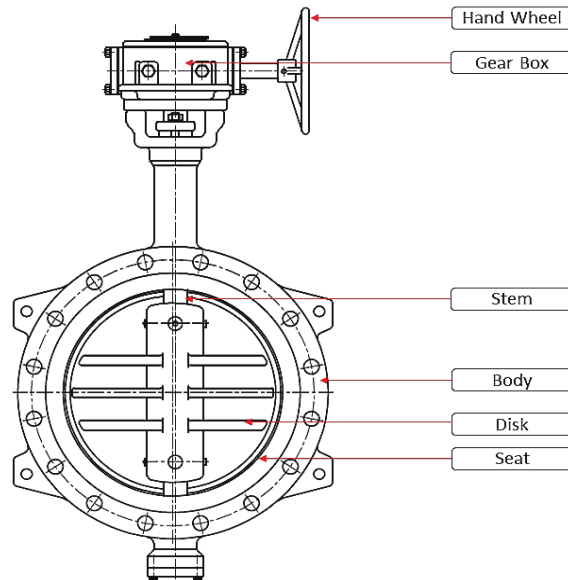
The typical butterfly valve has a short circular body, a round disc, shaft, and metal or soft seats
